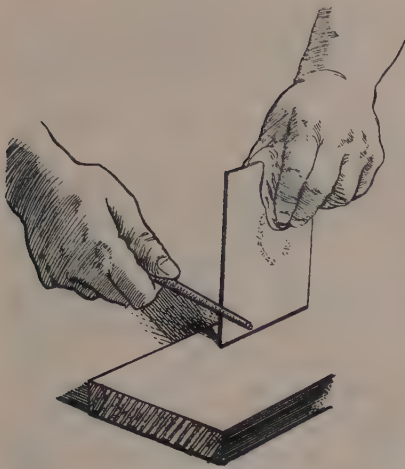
"TUNING" (OR TURNING) EDGE OF SCRAPER.
